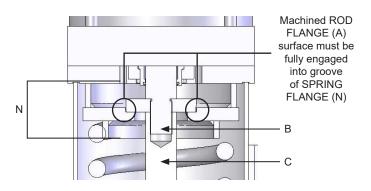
Ensure the Rod Flange and Spring Flange are fully engaged (Spring Cartridge cut-away for clarity)
